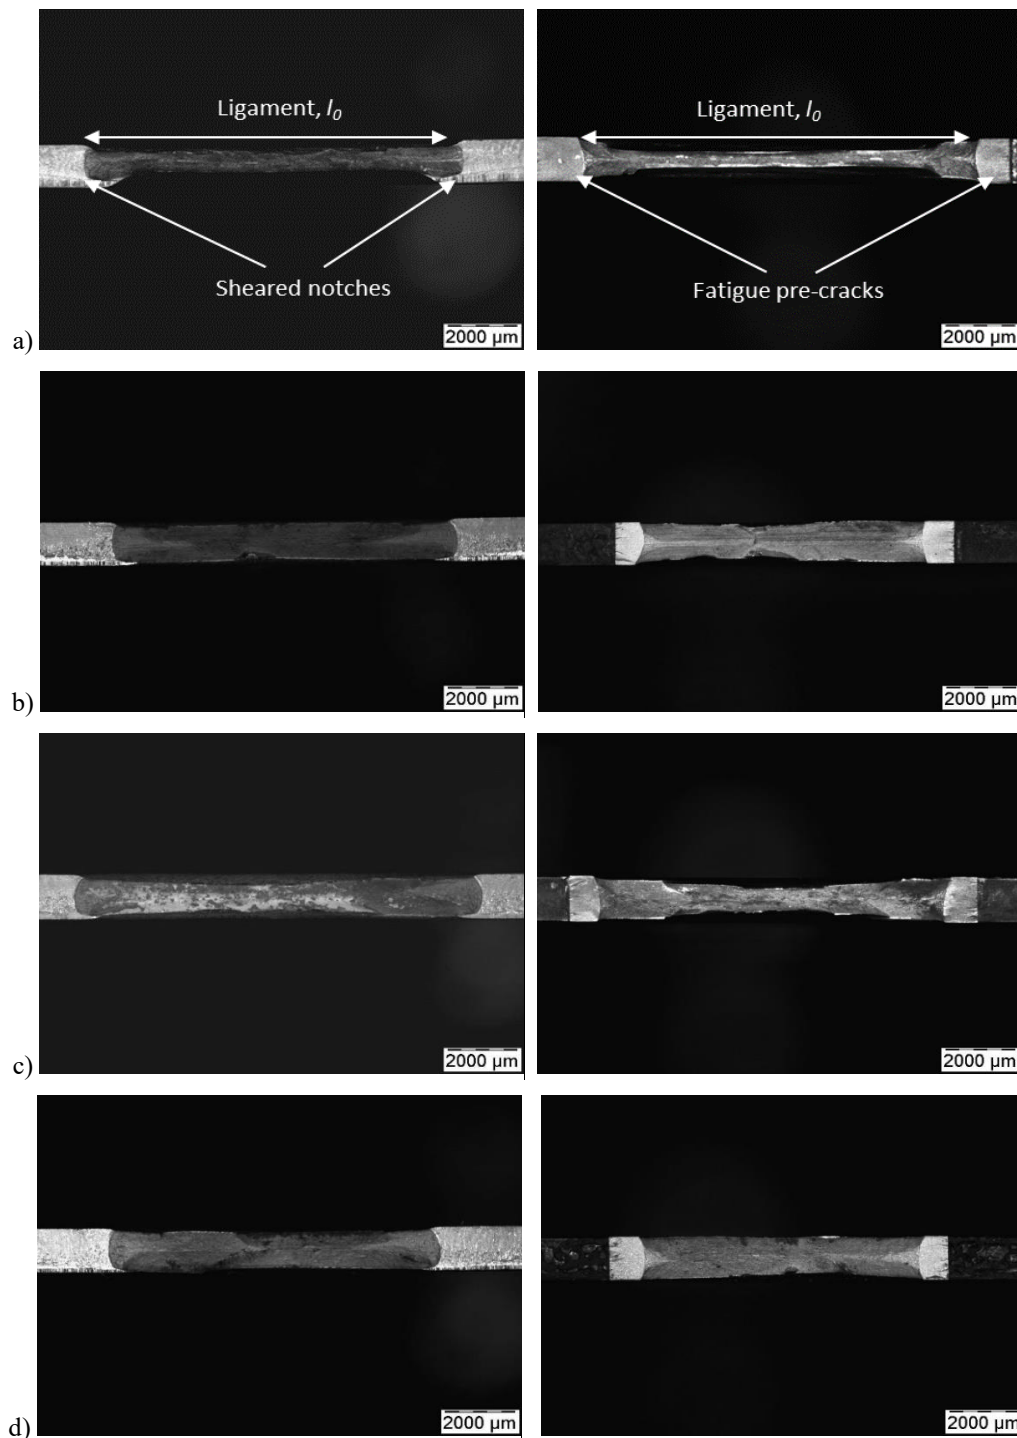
Fracture surfaces of DENT specimens with sheared notches (left) and fatigue pre-cracks (right). a) CP, b) DP-A, c) DP-B and d) 3rd GEN. The different areas (fractured ligament, sheared notch and fatigue pre-crack) are indicated in the first images.
